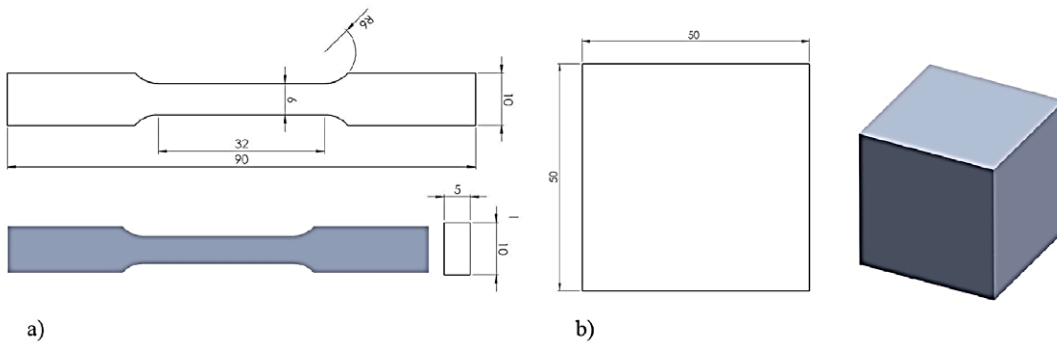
Engineering drawing of samples for mechanical testing. a) Tensile and b) Compression (units in mm).
